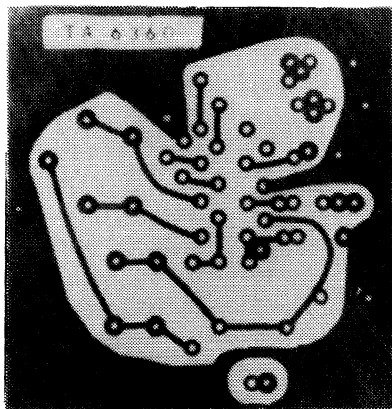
Template of CA3139Q circuit board (actual size, bottom view).
